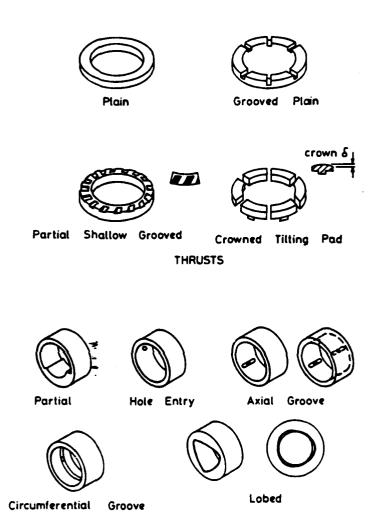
TWO TYPES OF JOURNAL BEARINGS
